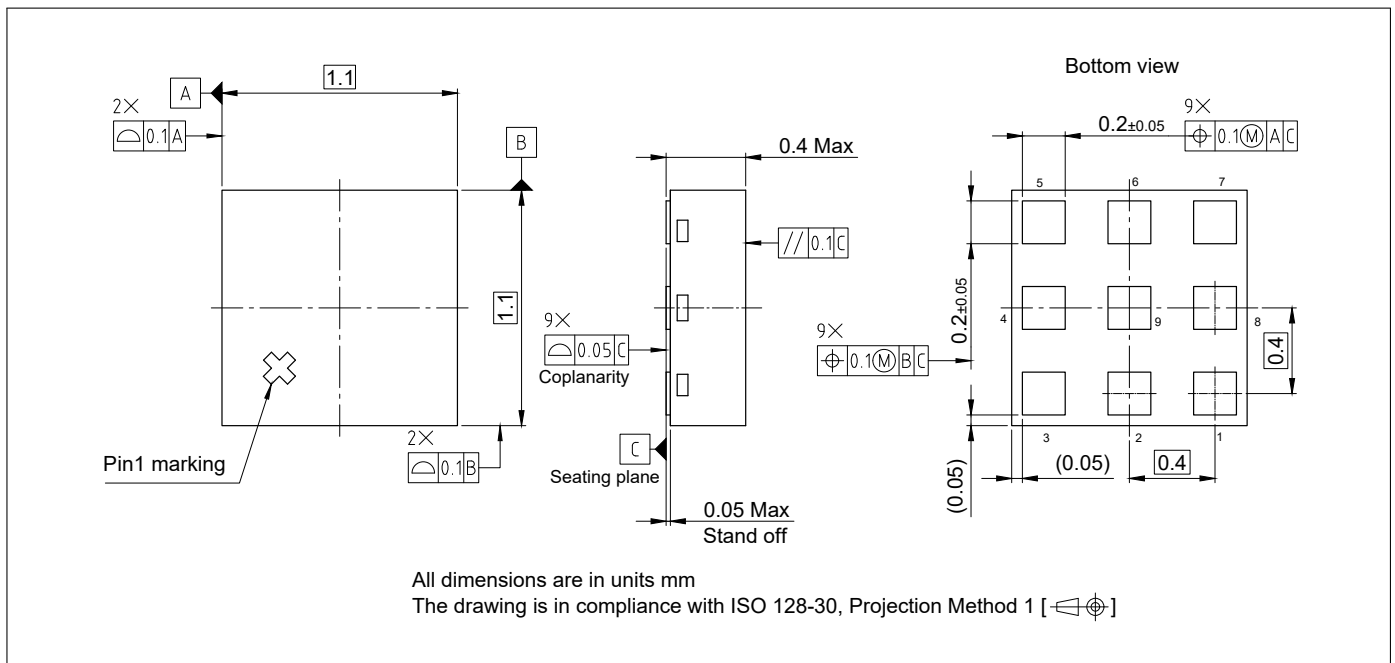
TSNP-9-6 Package Outline (top, side and bottom views)
